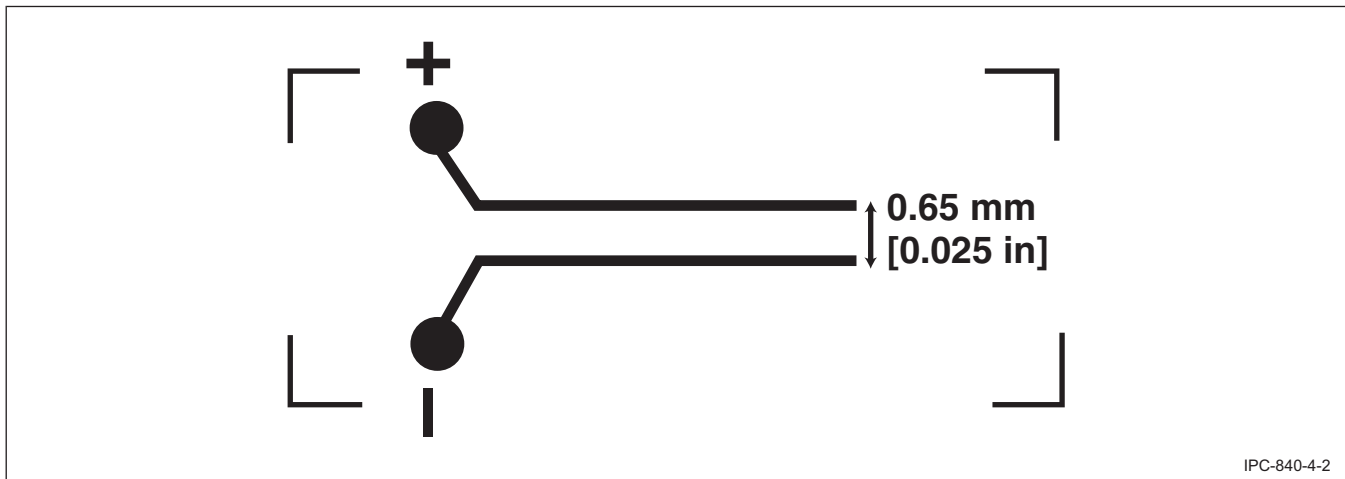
IPC-2221 Test Coupon E Layer 1 ("Y" Configuration)
